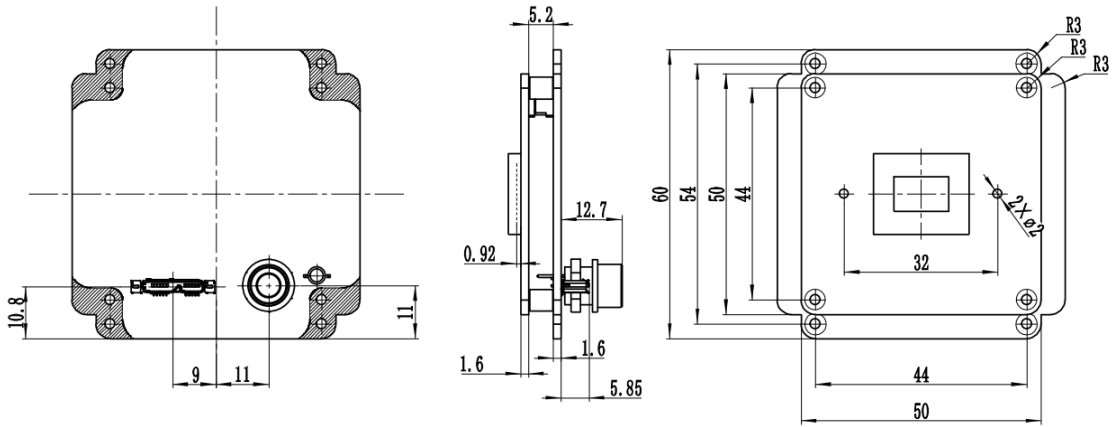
Dimensions of SCM/SCA circuit board (mm)
